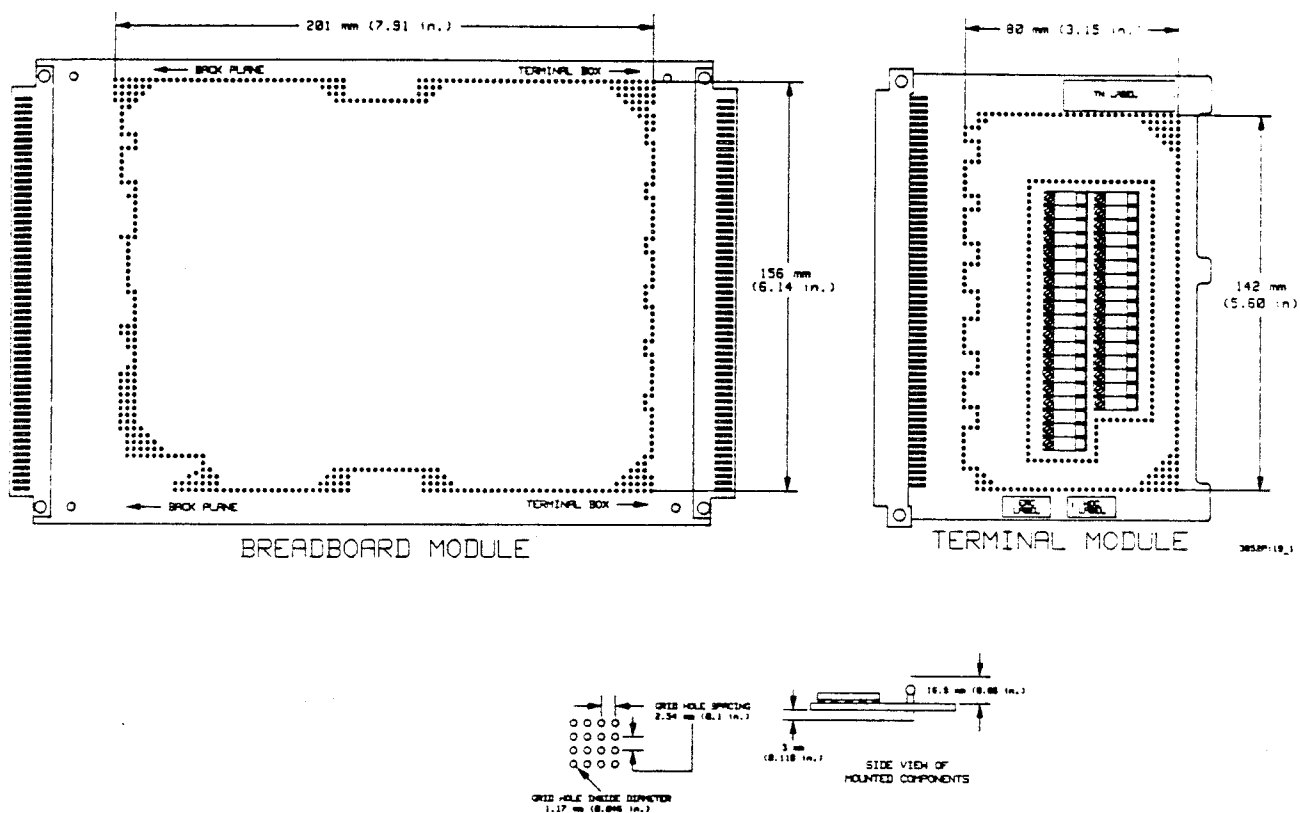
Dimensions and Component Height/Protrusion Restrictions
